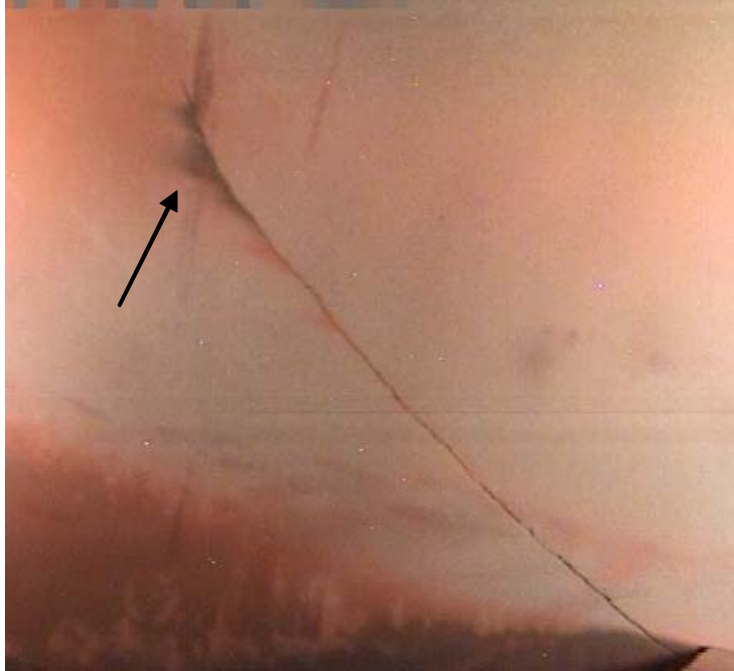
Mechanical Fatigue Crack with Black Oxide Decorating One End of Crack
